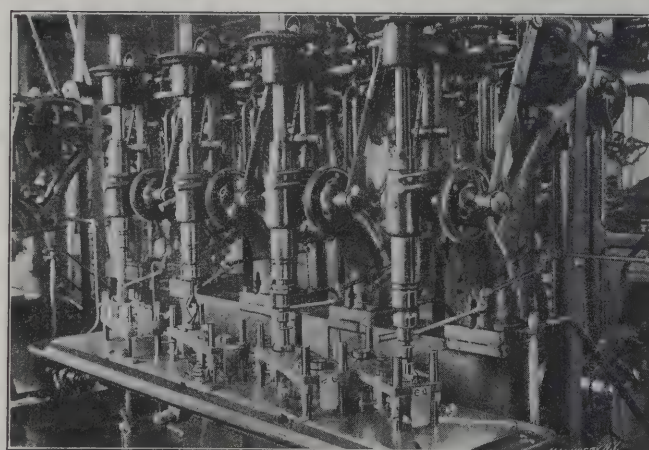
Gang Drill used in Drilling and Reaming Connecting-rod Ends
